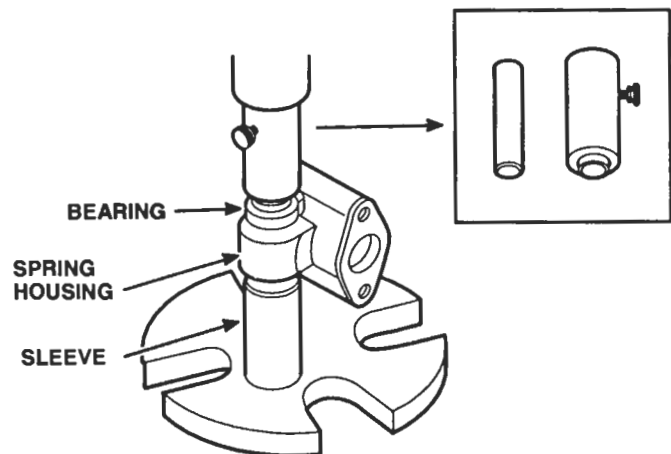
Installing Speed Control Shaft Bearings in Spring Housing
